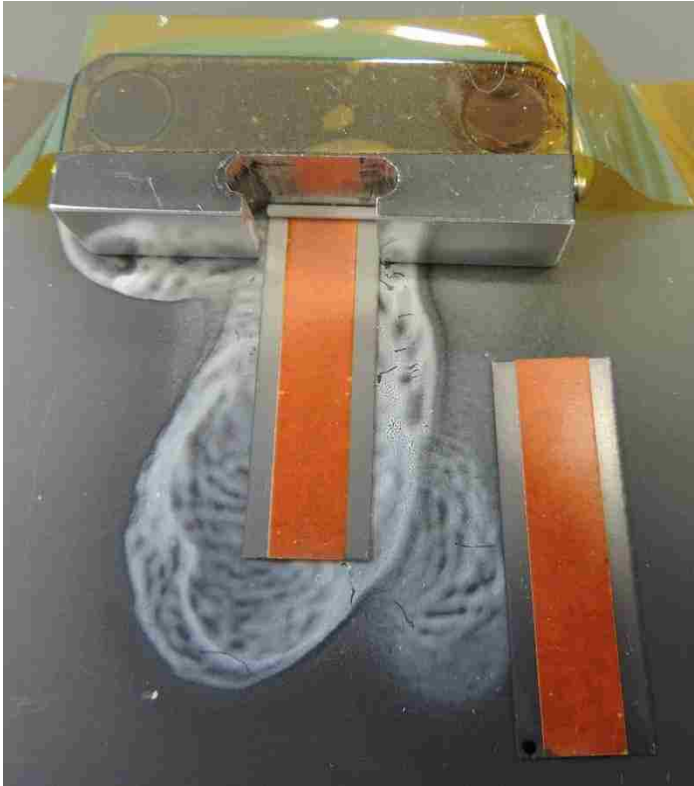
Image of pre-assembled sandwich with mold release agent to prevent adhesion to the flat surface where assembly took place.
